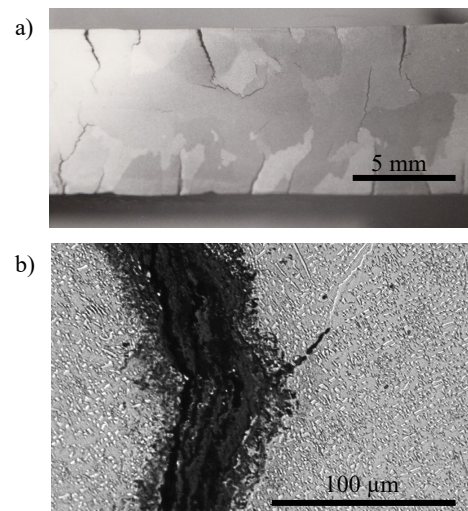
Cracks on the wall of a tray for carburizing furnaces made of 1.4849 cast steel: a) crack on the tray rib, b) optical microscope image of crack in carburized subsurface zone
